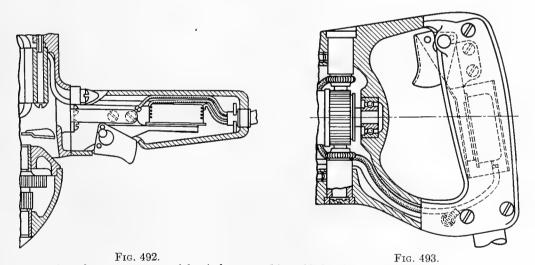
A modern-type commercial switch mounted in a side handle. Such switches are readily replaced as a unit, inexpensive, and sealed against the entrance of dirt. The switch opens as soon as the trigger is released unless the locking pin is set, in which case a slight pull on the trigger releases the locking pin and opens the switch.
